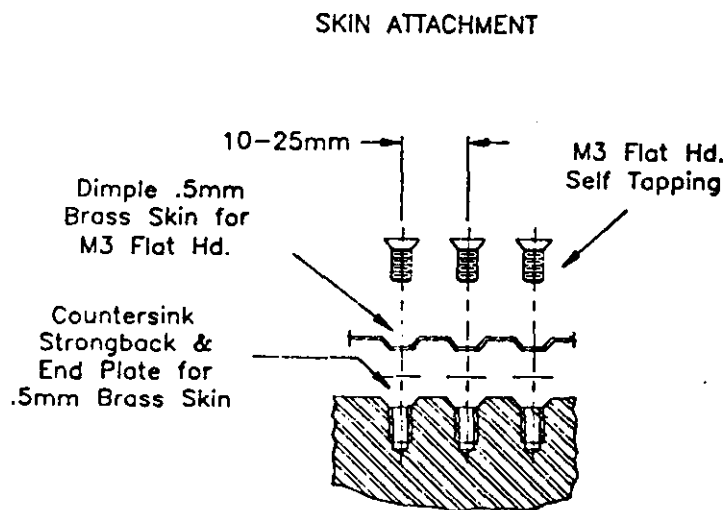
Fastening the skin to the Strongback, Endplate or Bottom plate.
